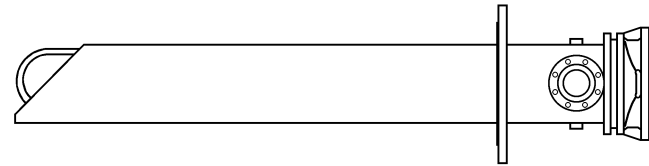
U-Tube Tank Suction Heater with Removable Bundle Assembly and Cast Flanged Head
